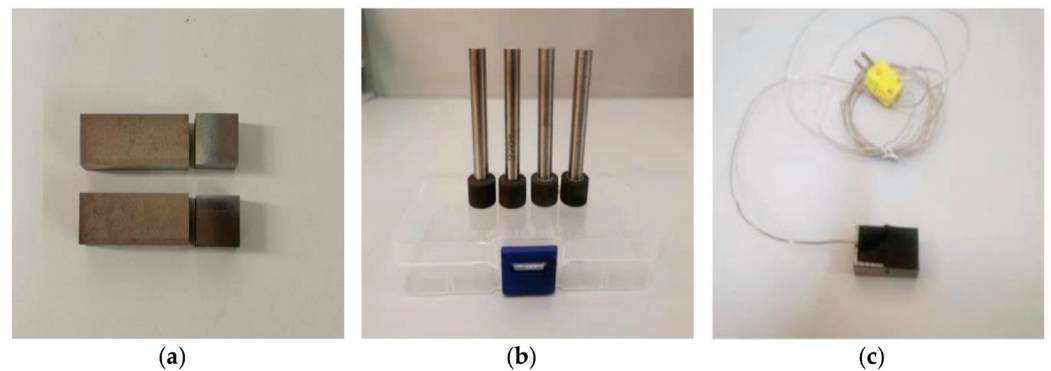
Workpieces, grinding wheels, and temperature test pieces used in the test. (a) TC4 workpiece. (b) Ceramic base CBN grinding wheel. (c) Temperature test piece.
